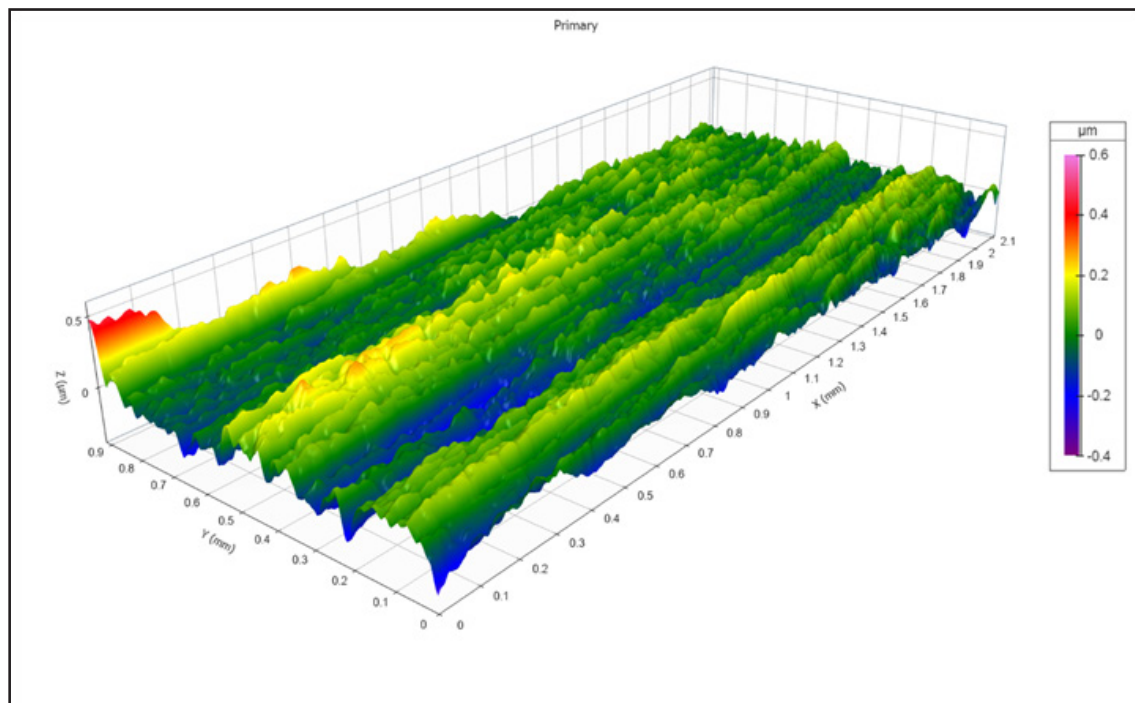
An areal (3D) measurement of a gear tooth after removing the involute shape.
